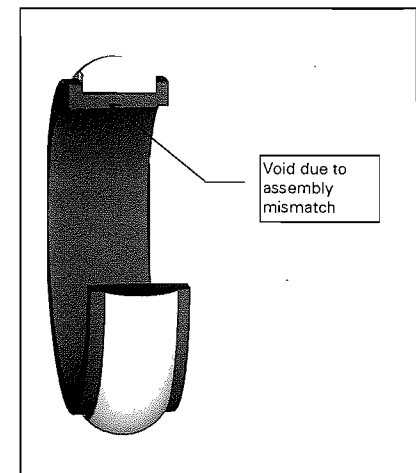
Mismatch during Assembly (Mechanically Bonded Ring Assembly)
